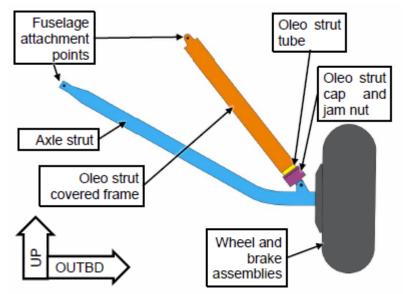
Schematic drawing looking forward illustrating the right main landing gear components with the oleo strut assembly in the static position.
